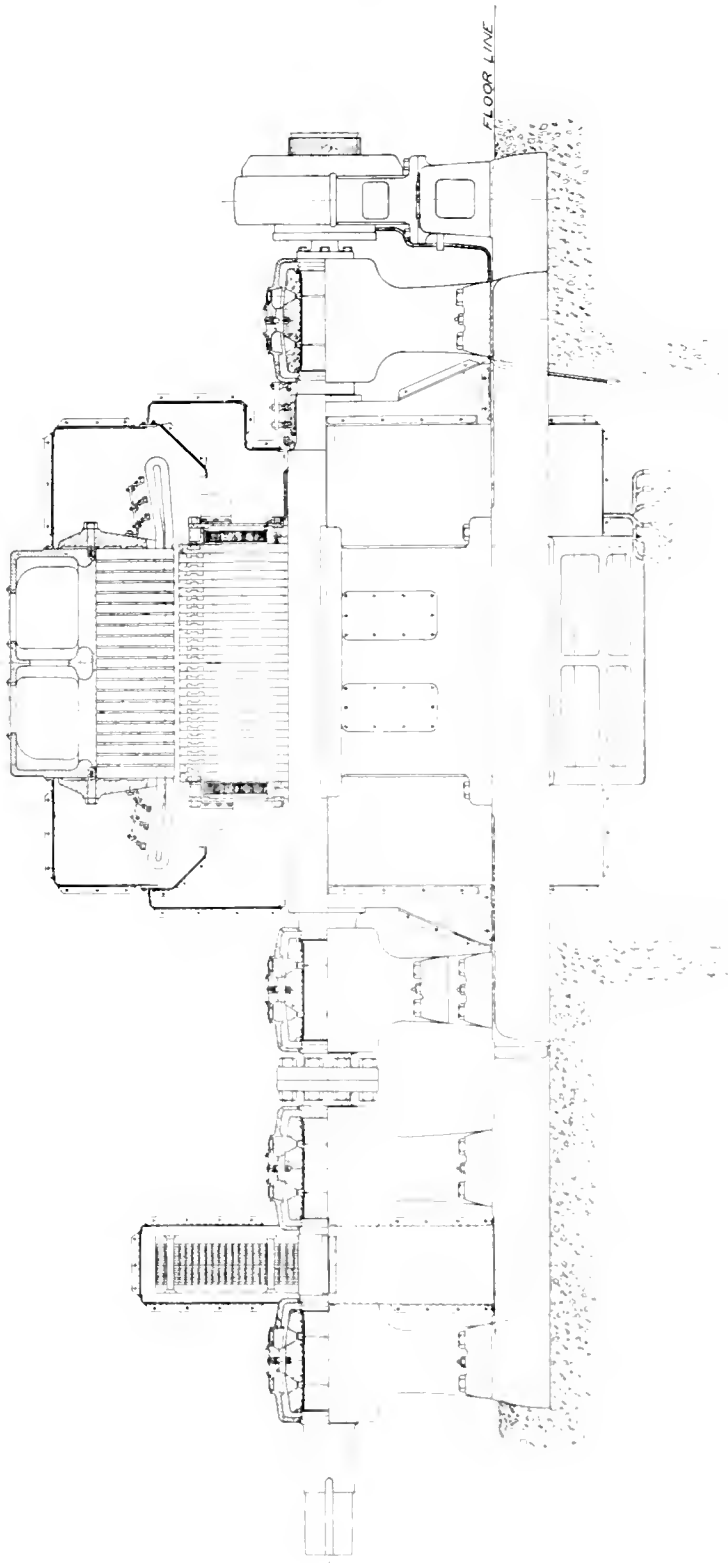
General Arrangement of the Alternator, Exciter, Bearings, and Flywheel. The overhung waterwheel is not shown.
